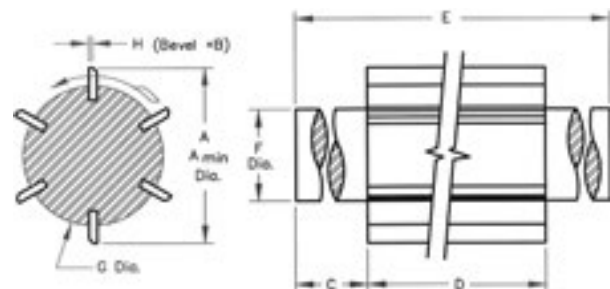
Side view of a rotary knife (see Tables 1a and 1b for dimensions).
